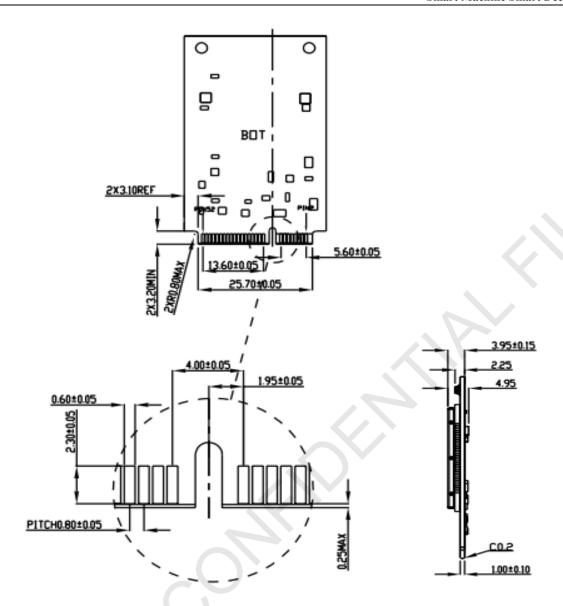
Dimensions of SIM5360-PCIE (Unit: mm Bottom and Side view)
